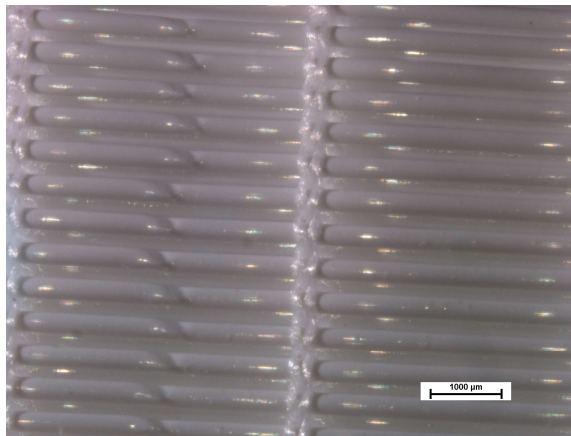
Crimp defect testing showing crimps 1-20.
